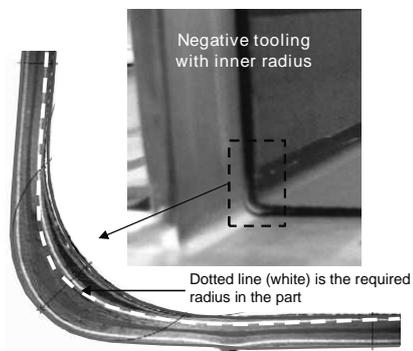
Steel tooling for the manufacture of rotor blades
